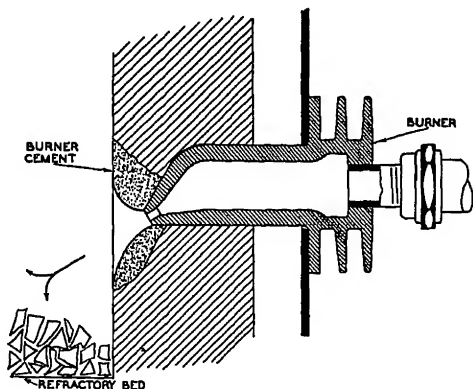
Refractory bed type of furnace. (Surface Combustion Co.)
